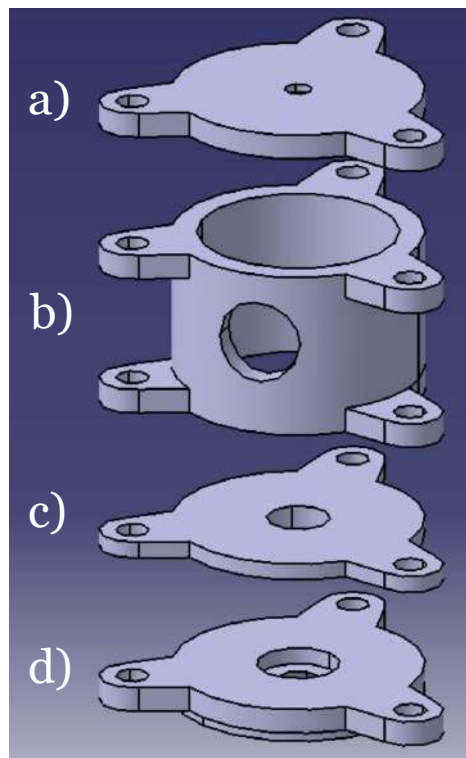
Parts of a previous design that use a three-holed extension configuration. a) Lid part; b) Body part; c) Pinhole holder lid; d) Pinhole holder base [31].
